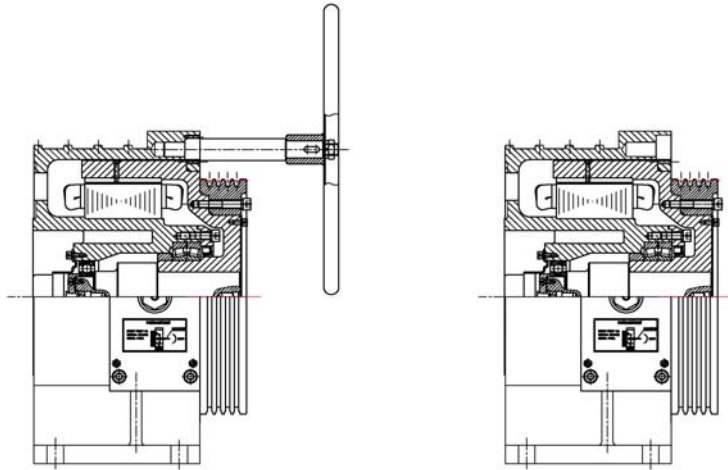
Inserting rolling gear into machine base      Fig.37 Status before rolling operation
